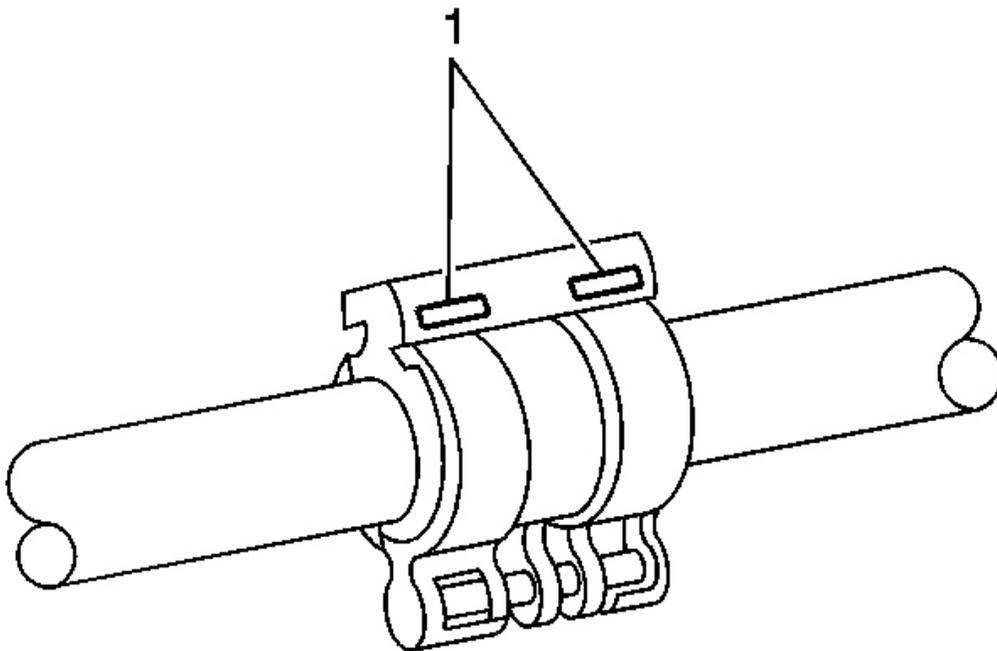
A/C Coupling Assembly Locking Tab Access Slots
